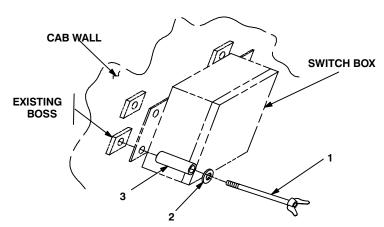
(2). MK and Radio Installation: Radio Equipment Locations
